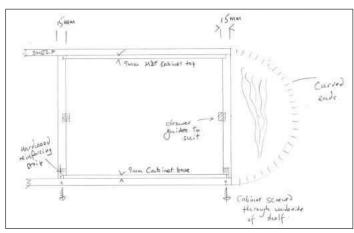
Outline drawing of lower drawers – upper drawers similar
